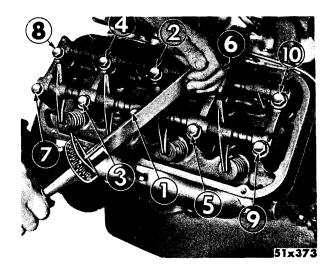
Tightening Cylinder Head Bolts (FirePower)
